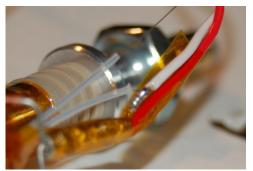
Thermistor lead soldered to white wire. (Older wire style shown.)
